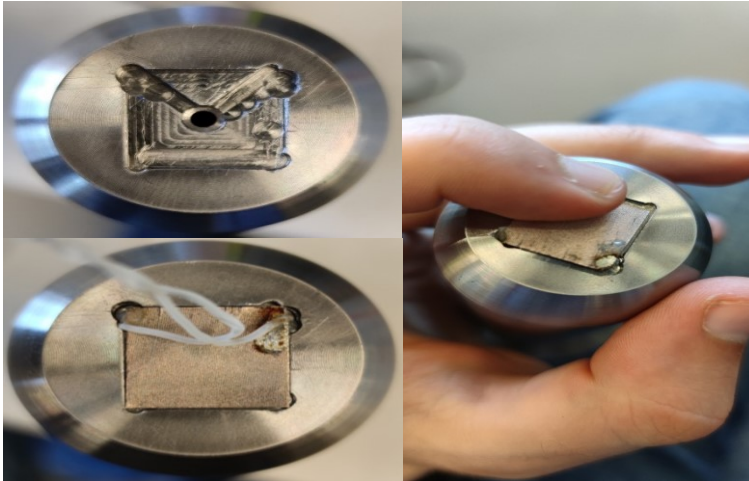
Fitting of a Gradient Heat flux Sensor. The bottom left picture shows that the right-side wire was soldered without the use of laser soldering.
